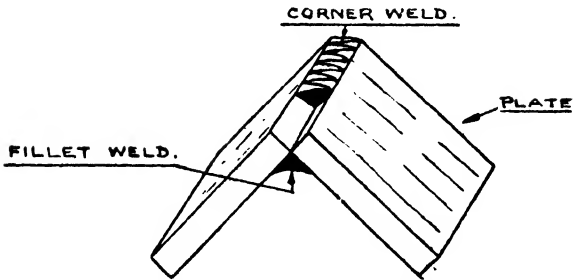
FILLET WELD AND CORNER WELD
